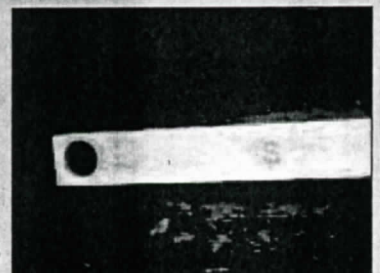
There is an "S" stamped in the throttle lever arm.
